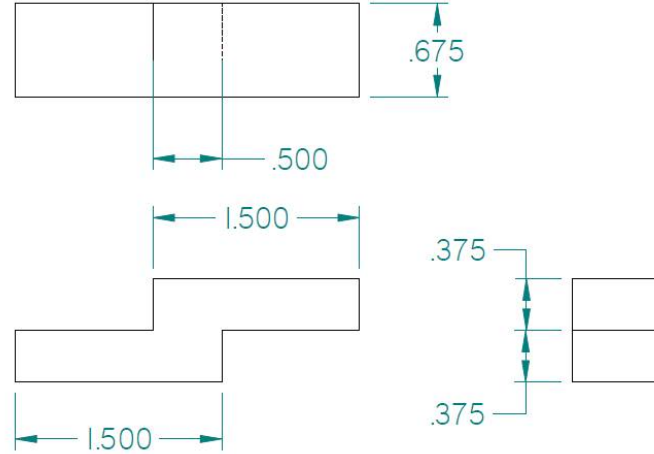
Dimensions for SonicSolderTM shear specimen, all dimensions in inches.
